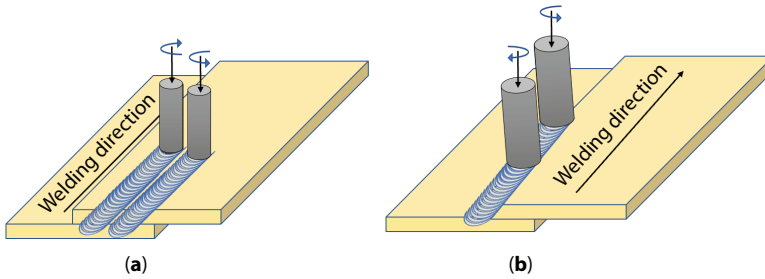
Scheme of (a) parallel-twin tool FSW, (b) tandem twin-tool FSW.
